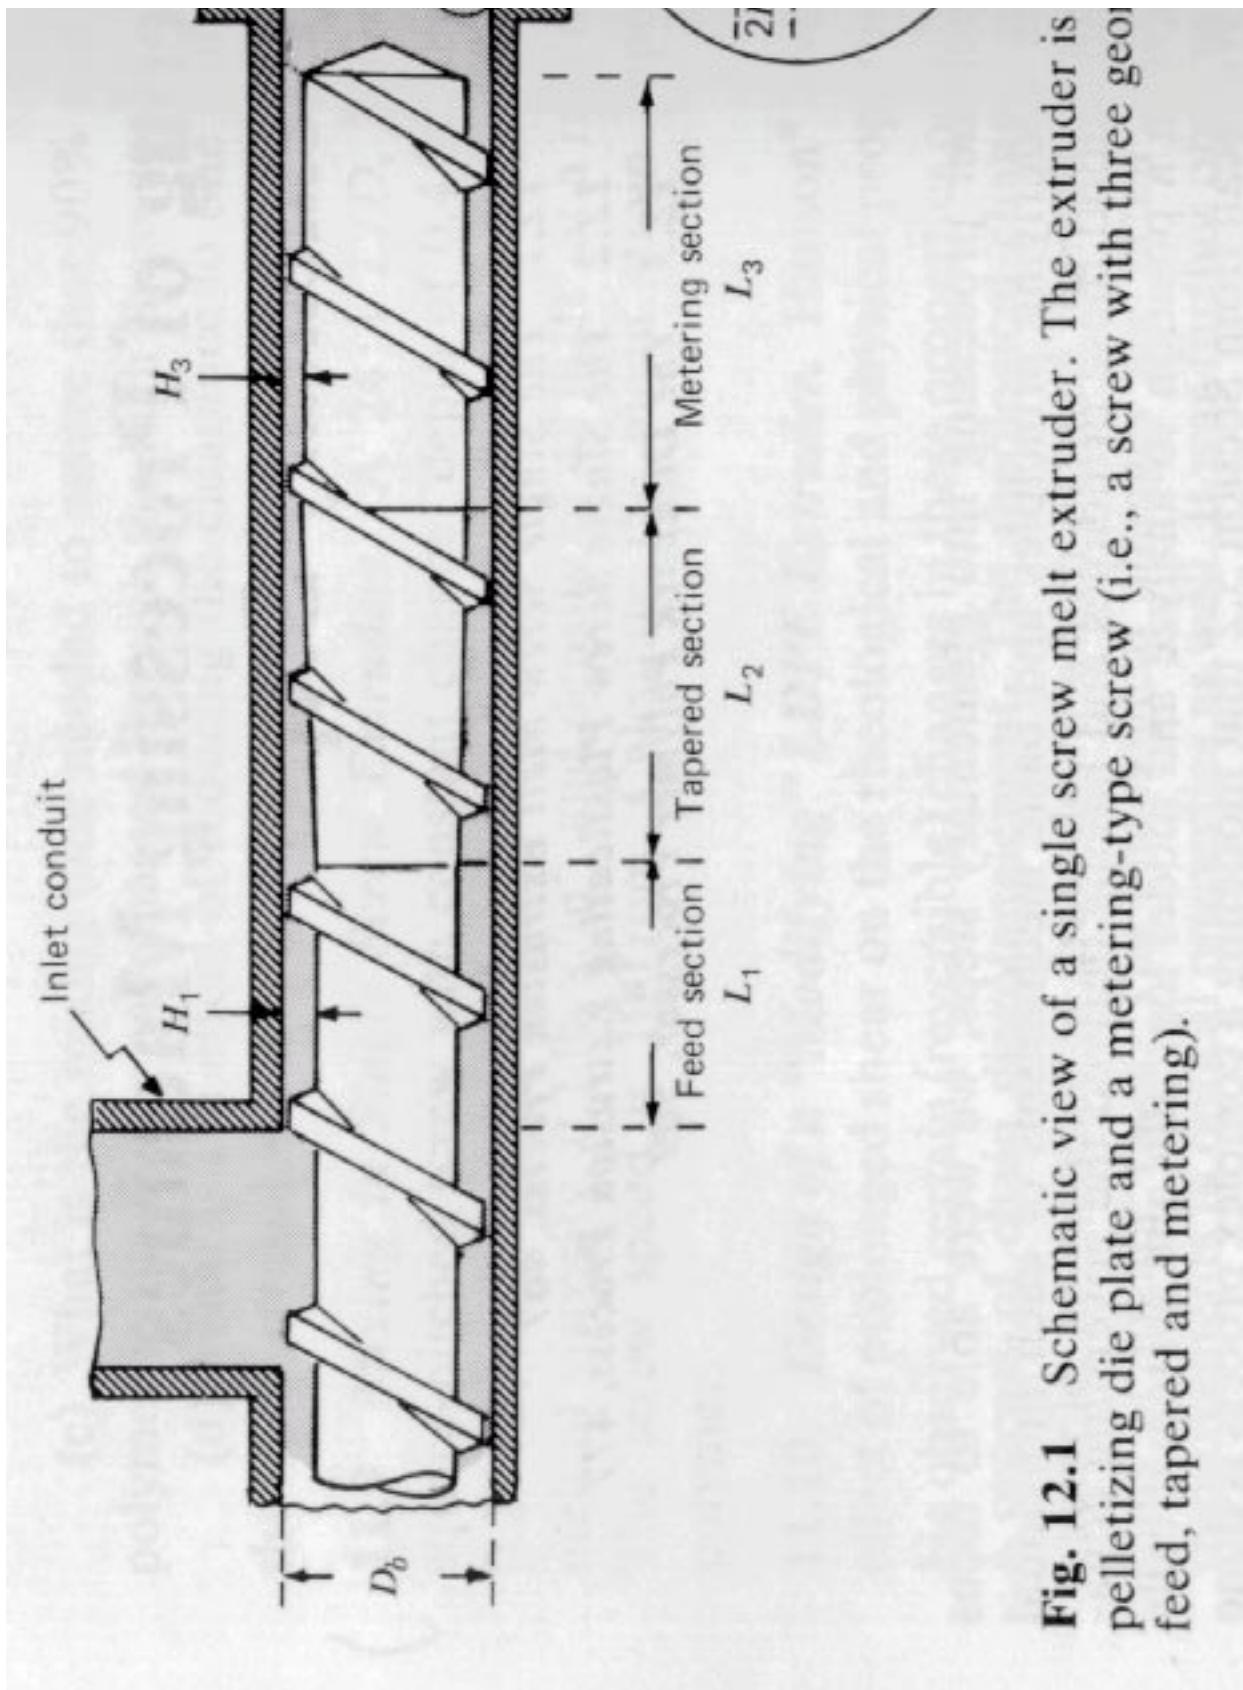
Schematic view of a single screw melt extruder. The extruder is pelletizing die plate and a metering-type screw (i.e., a screw with three geometric feed, tapered and metering).
